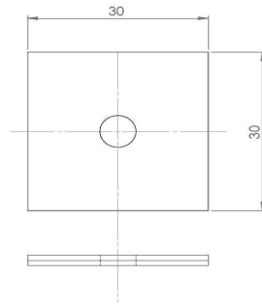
Schematic appearance of the welding samples and weld position
